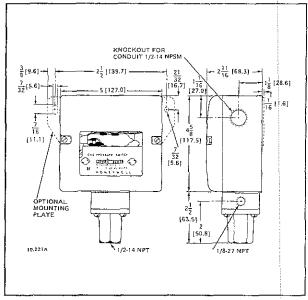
DIMENSIONS IN in. [mm] OF THE C647A.
